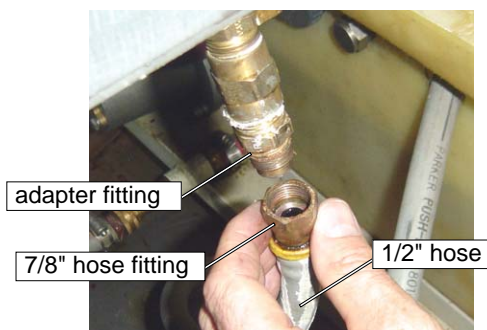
Connect the Hose Fitting to the Adapter Fitting.
